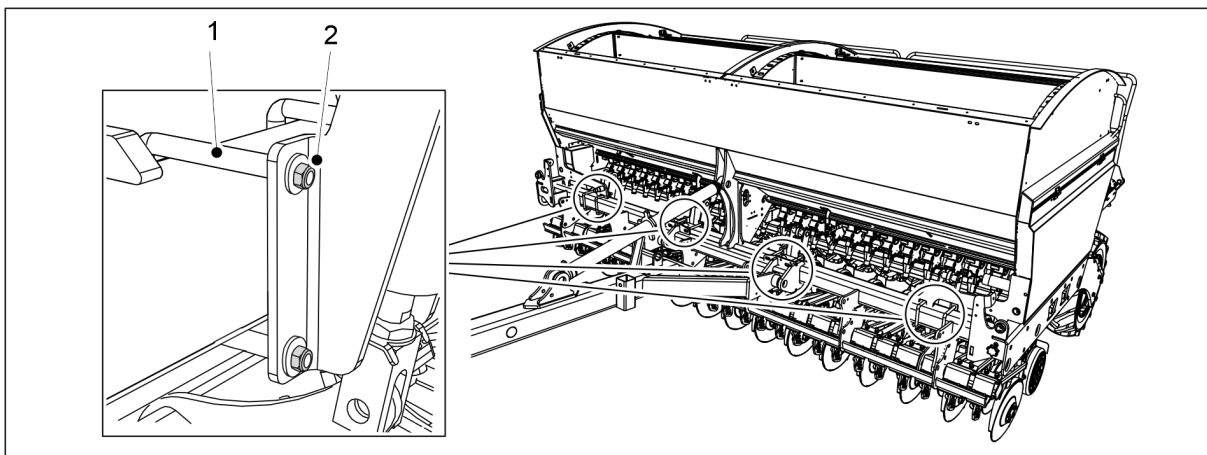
217. Coultter pressure bolts
